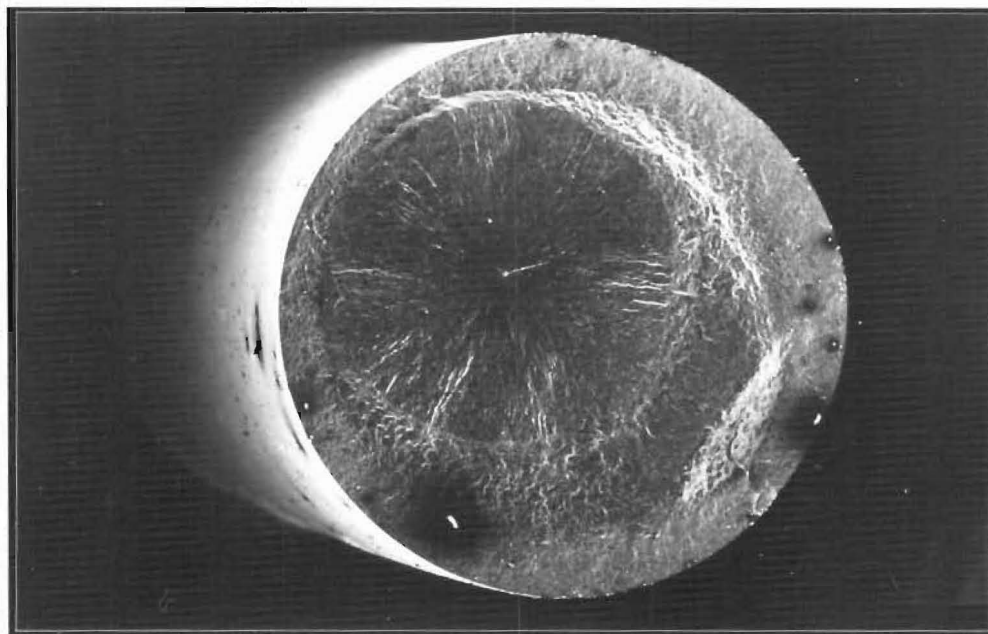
Typical fracture surface for specimens 11A.
